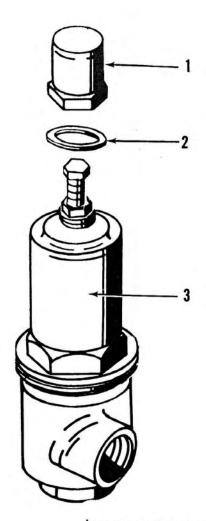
Main cylinder and plane ger assembly, installed view.
